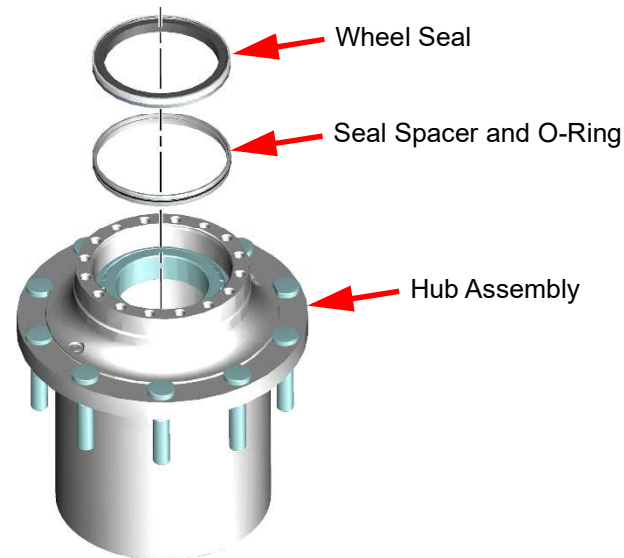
Removing Wheel Seal, Seal Spacer, and O-Ring from Hub Assembly
